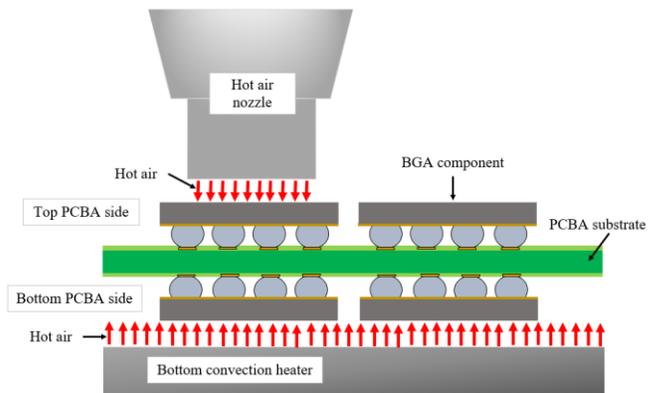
Schematic of BGA component being reworked with hot air rework machine
